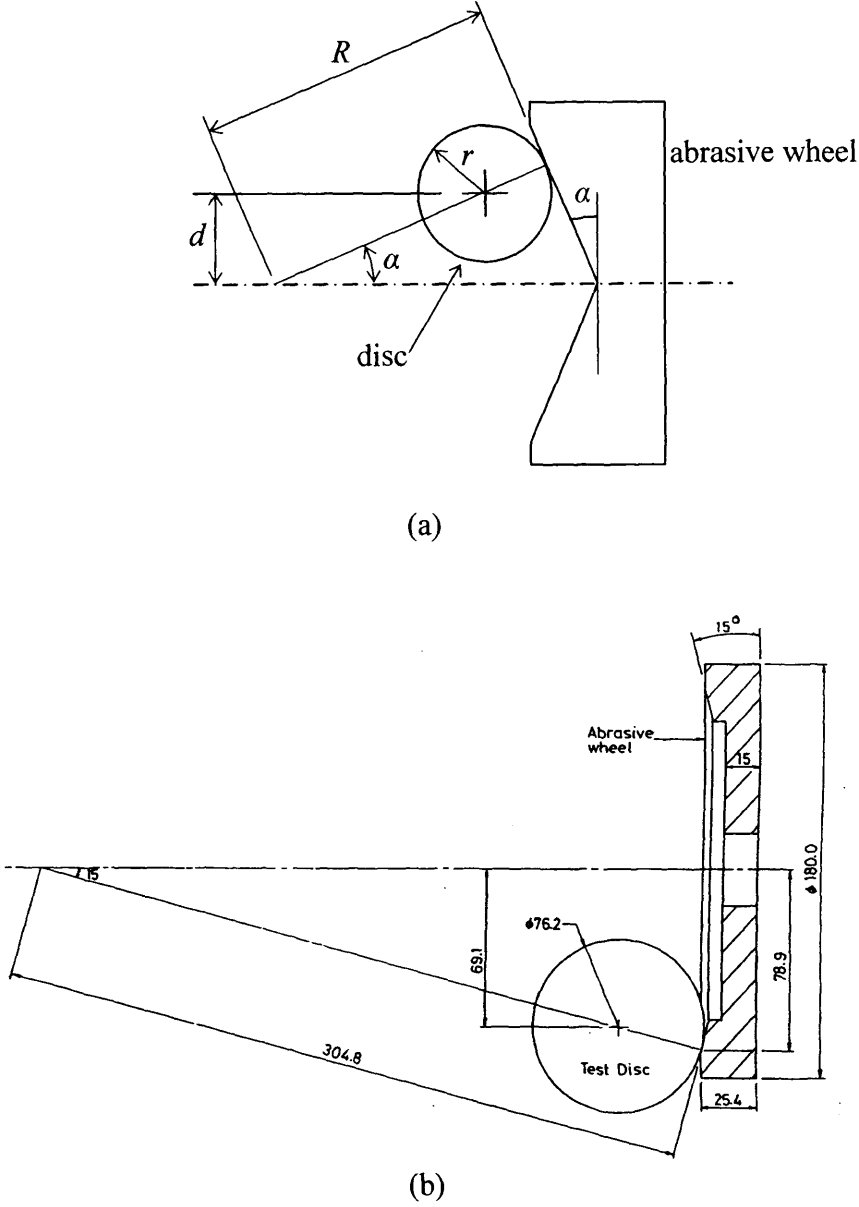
Axial grinding of discs: (a) Illustrating the principle of disc crowning using a conical abrasive wheel; (b) scale drawing of the grinding configuration with dimensions used.
